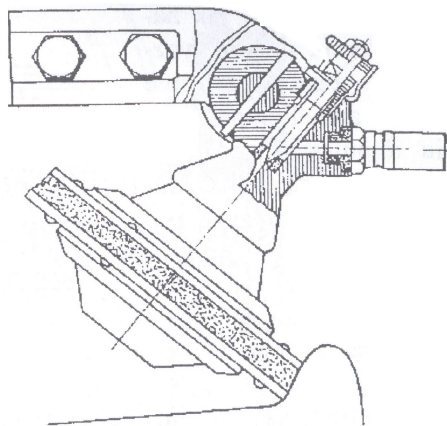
System of wheel flange lubrication in a vehicle – the direct contact type [9]
